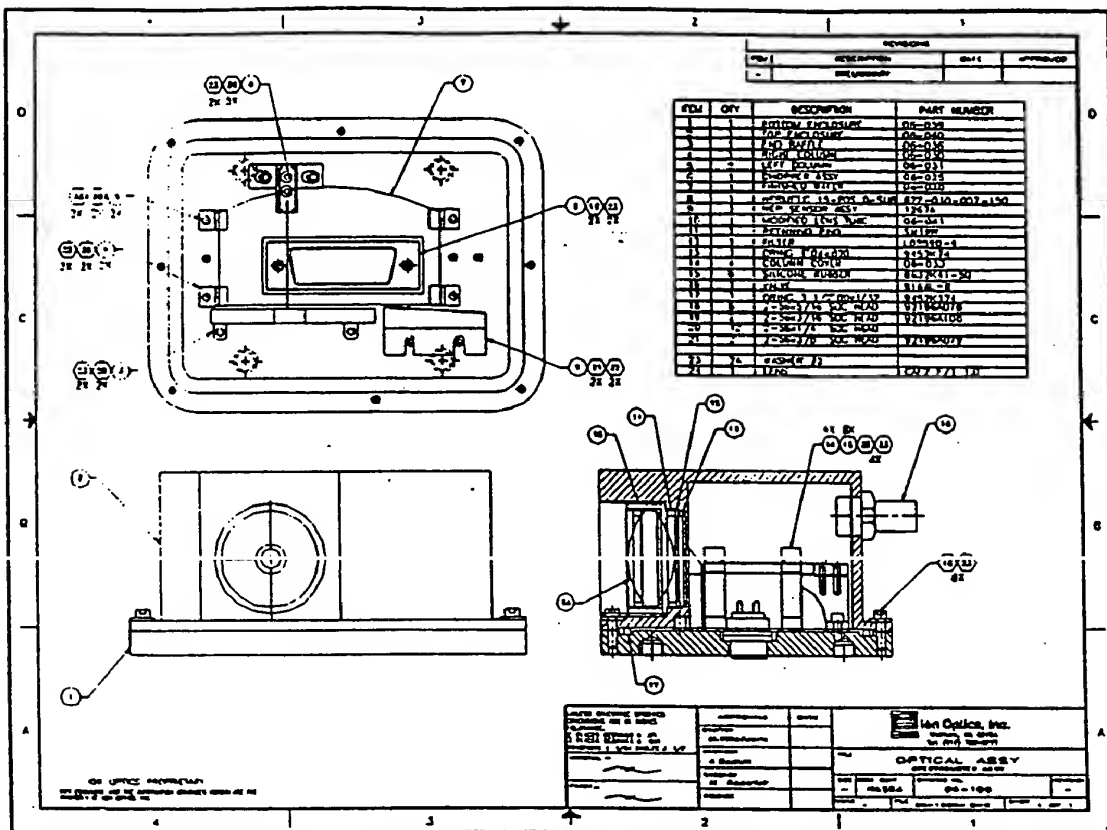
The design of the optical housing and mounts is essentially complete. This drawing shows the assembly drawing for the optical housing.
